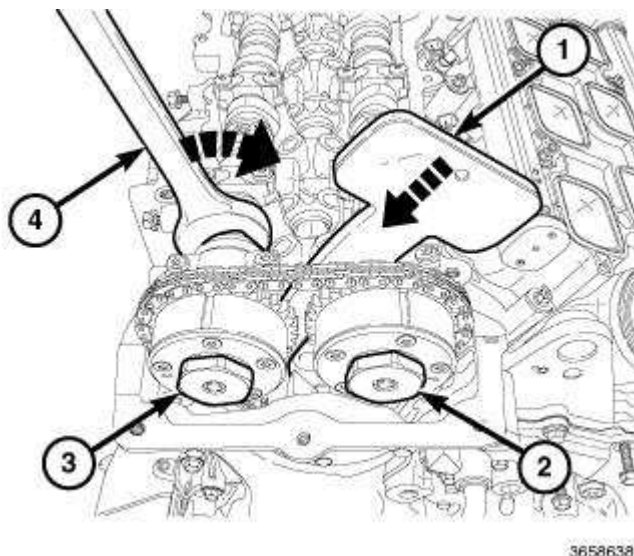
Compressing Tensioner By Slightly Rotating Exhaust Camshaft Clockwise
